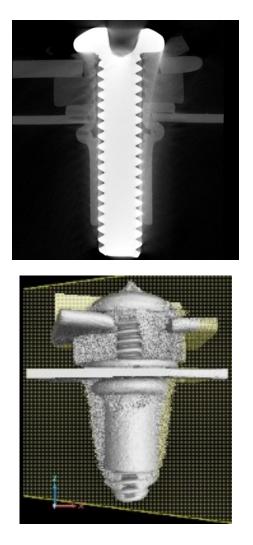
tomographic view of assembly with an insulating washer in good condition (source: BEA)
